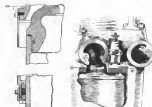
DETAIL OF CYLINDER HEAD AND WATER PASSAGE. FIG. 5. SECTION OF CYLINDER HEAD, SHOWING WATER PASSAGES AND CONNECTIONS.
